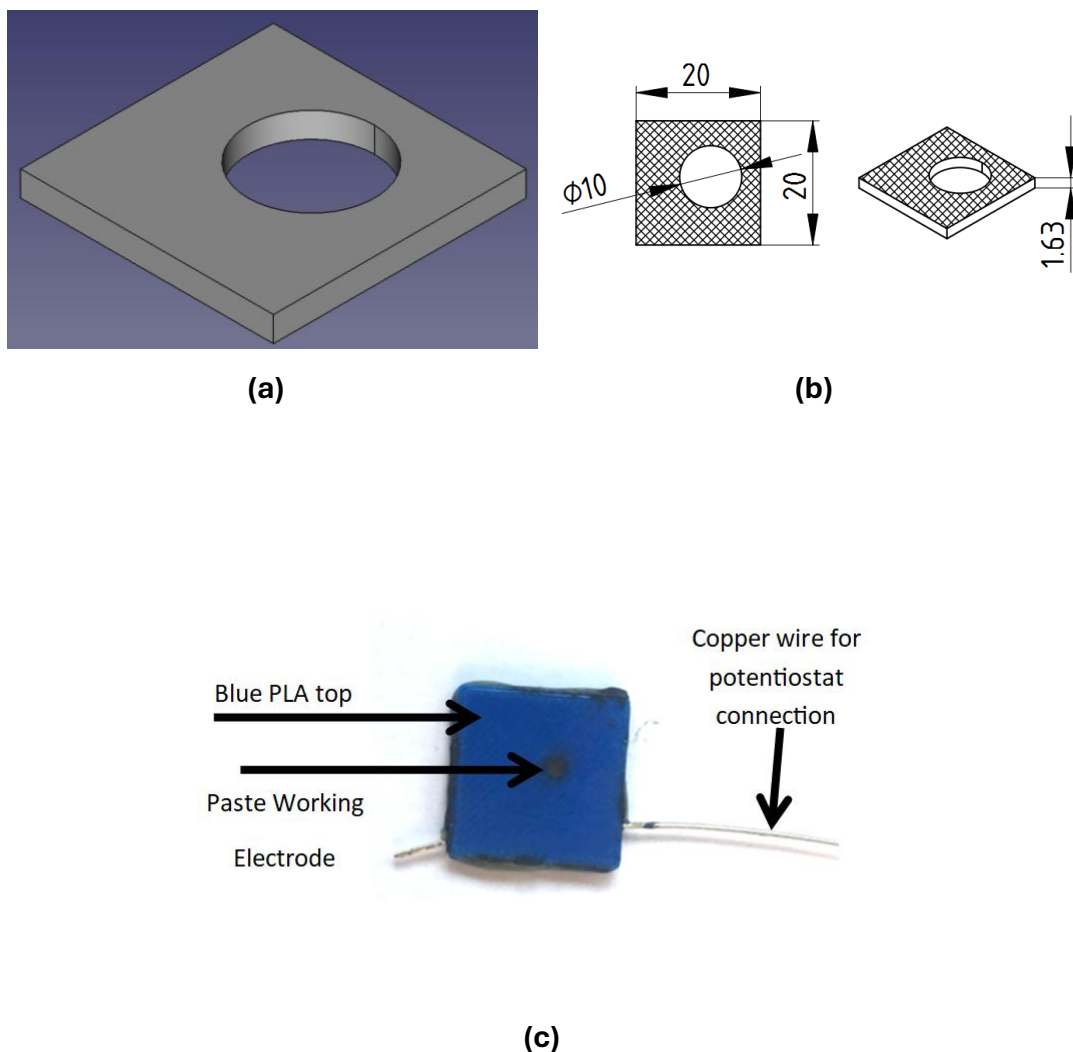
The carbon paste electrode used in this chapter. The initial CAD of the top, PLA component of the electrode (a), drawing of the CAD with dimensions in mm (b) and resulting electrode (c) are shown. It should be noted that the hole in the middle of the PLA component was varied.
